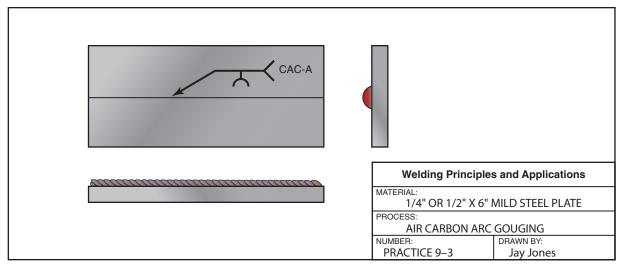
Air carbon arc weld gouging.
